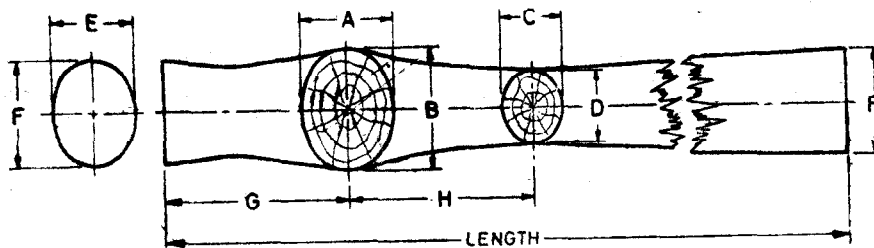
TYPICAL SKETCH OF WOODEN HANDLE FOR HAND HAMMERS
